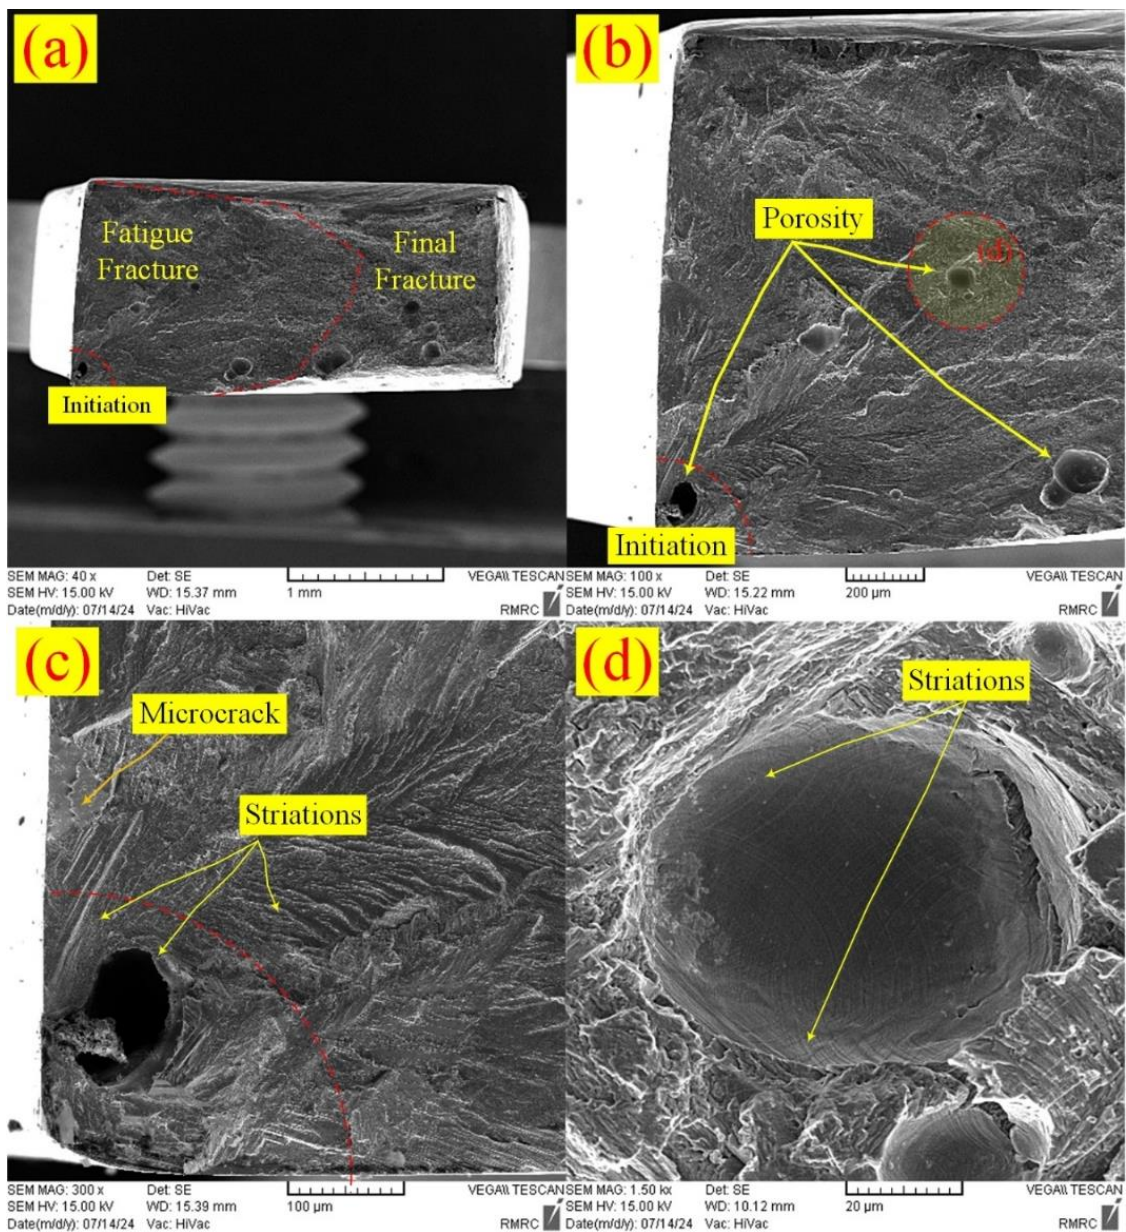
Fatigue fracture surface of weld metal fatigue specimens at stress amplitude of 250 MPa
